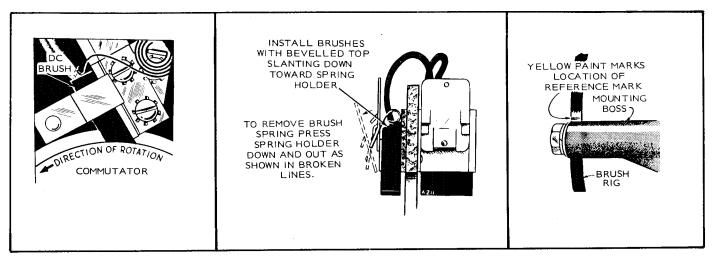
WELDER BRUSH RIG ADJUSTMENT
